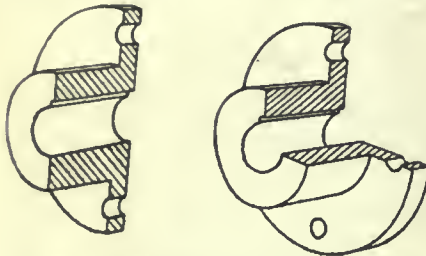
HALF SECTION REMOVED. FIG. 9—QUARTER SECTION REMOVED.
